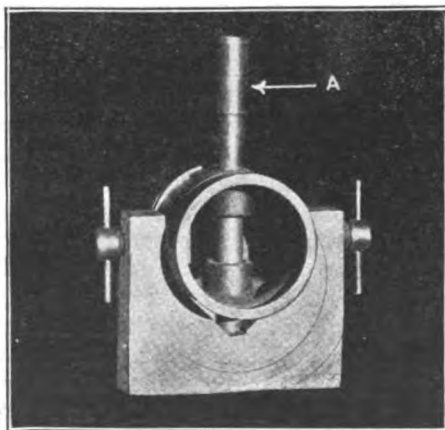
JIG FOR REMOVING AND REPLACING BUSHINGS
